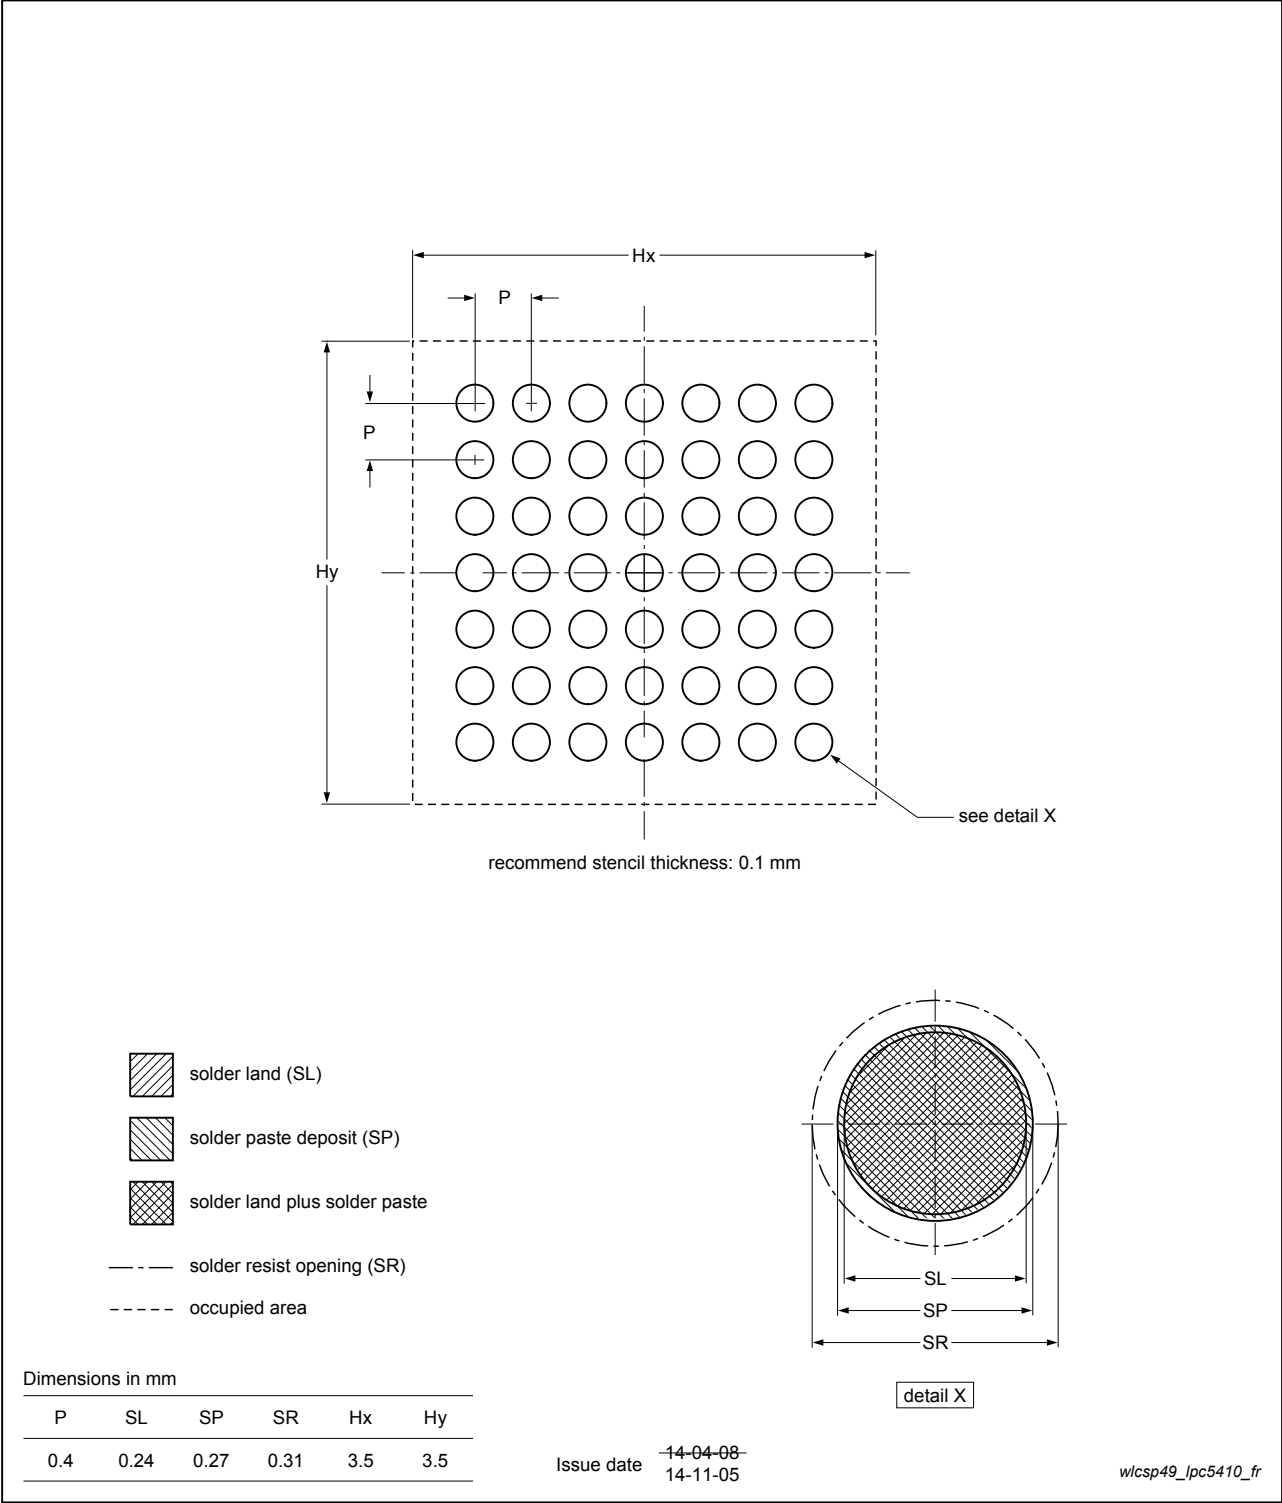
Wave soldering footprint for WLCSP (OL-LPC5410)
